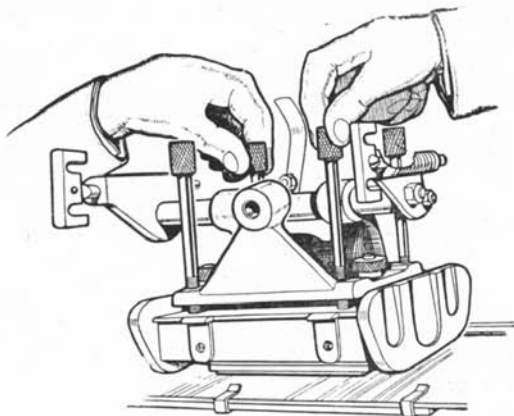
Loosening the bed-adjusting screws. This operation should only be carried out if absolutely necessary. Note particularly the position of the hands, releasing diagonally opposed screws.
